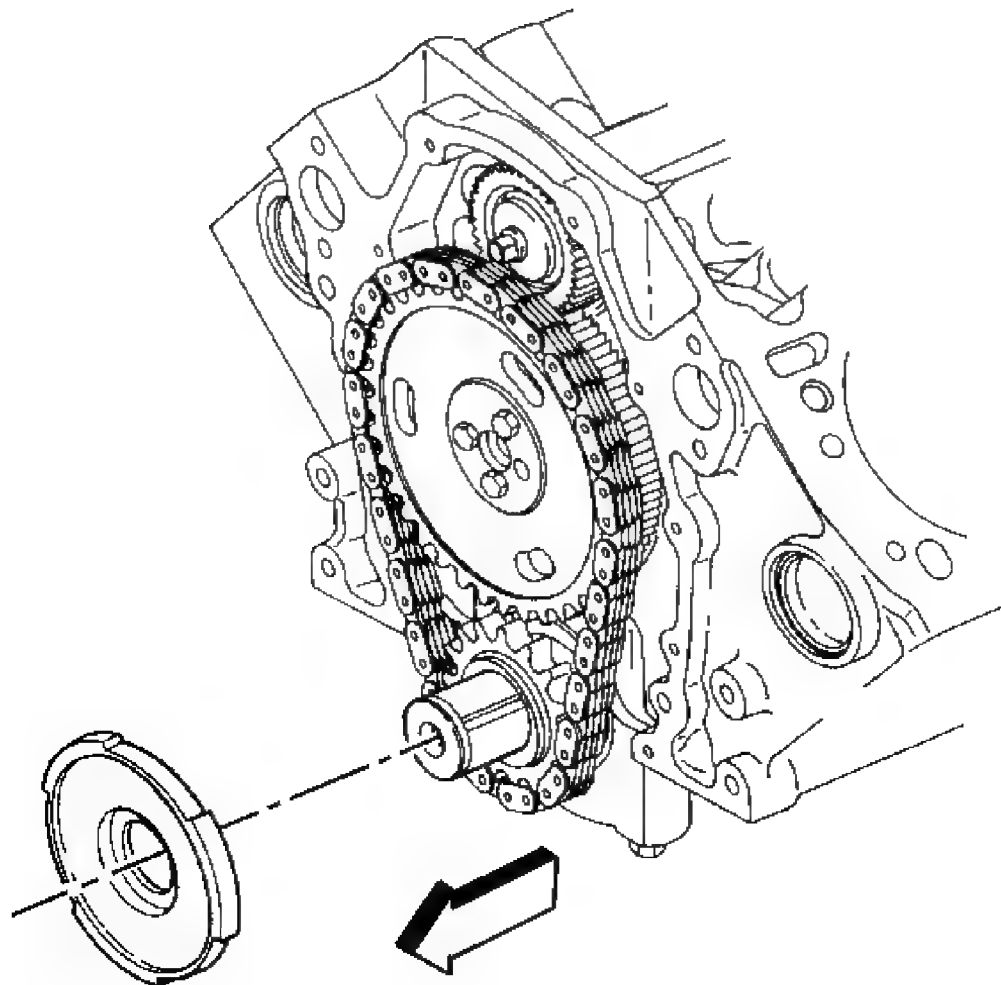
View Of Crankshaft Position Sensor Reluctor Ring
